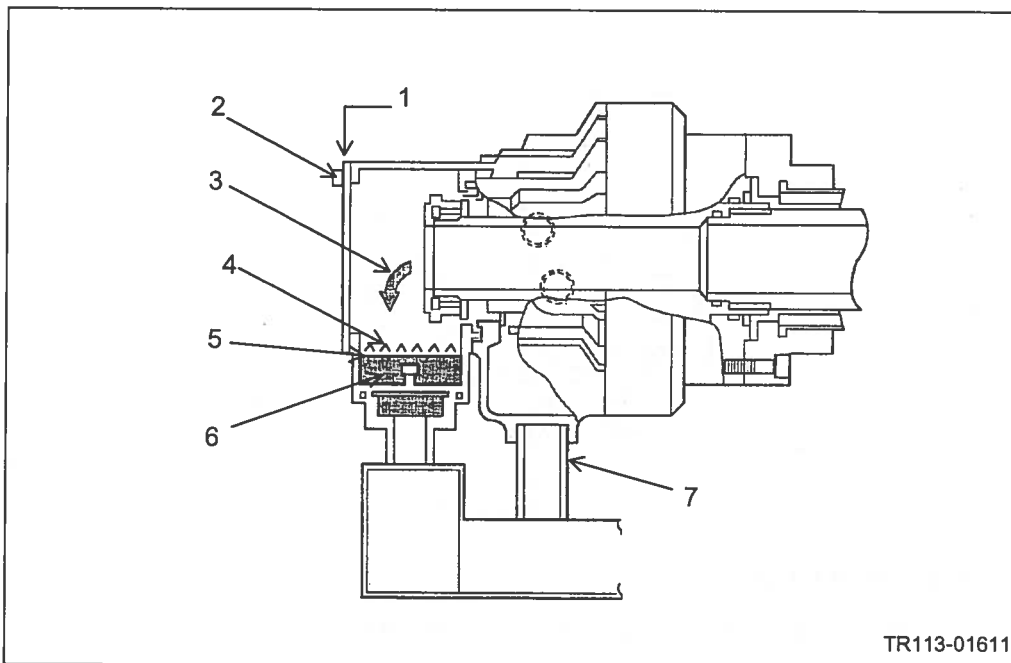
Cleaning the chucking cylinder (hydraulic chuck)
